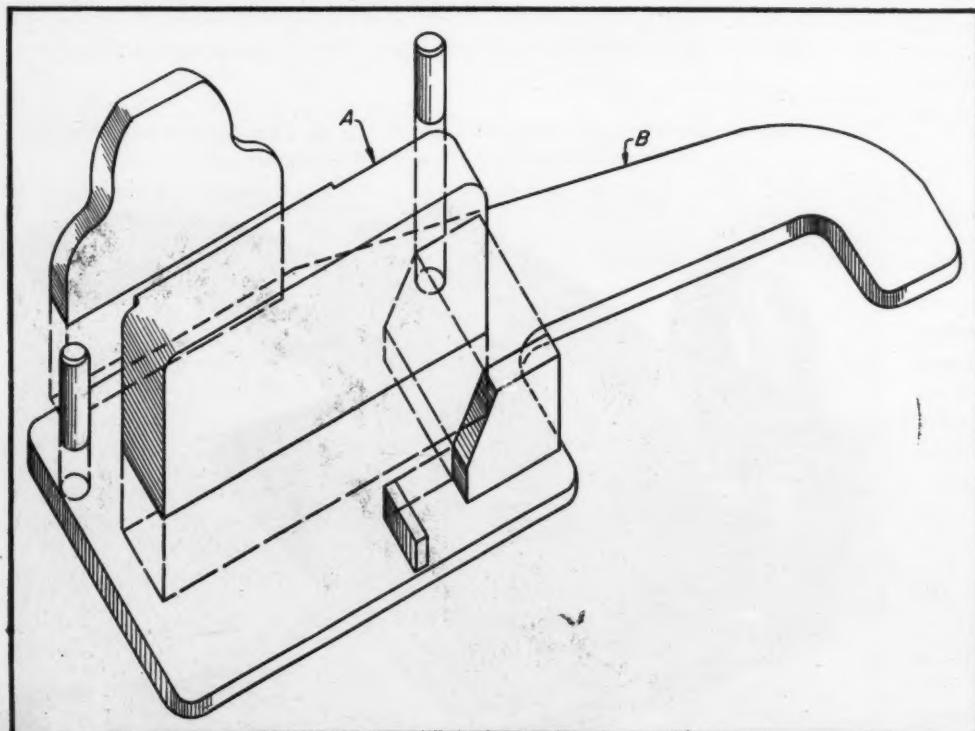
Drawing showing seven parts used to make the base in *Fig. 6
